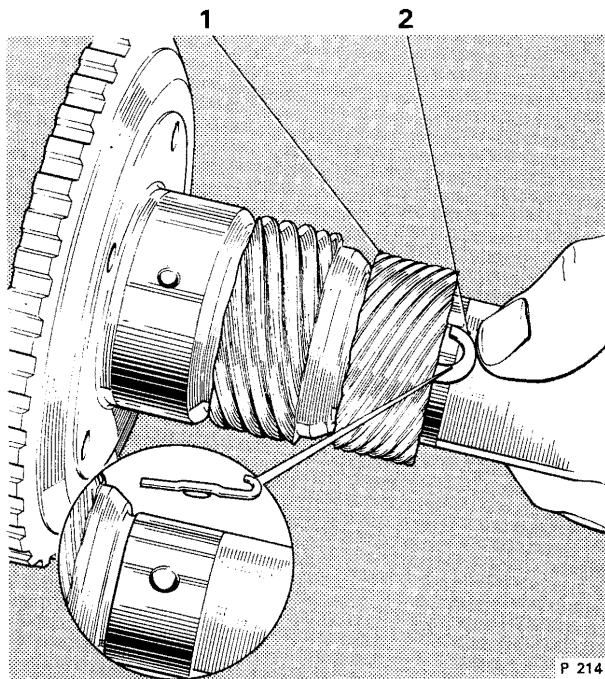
REMOVING NYLON SPEEDOMETER DRIVE GEAR
